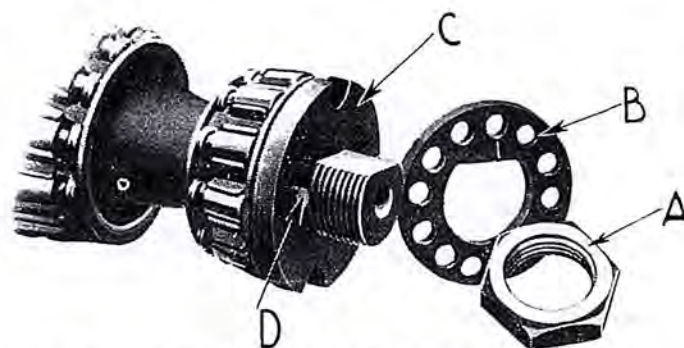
Front Wheel Bearings and Adjusting Nuts.
